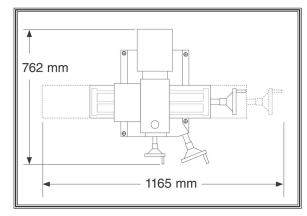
Minimum working clearances and mill mounting bolt pattern.
